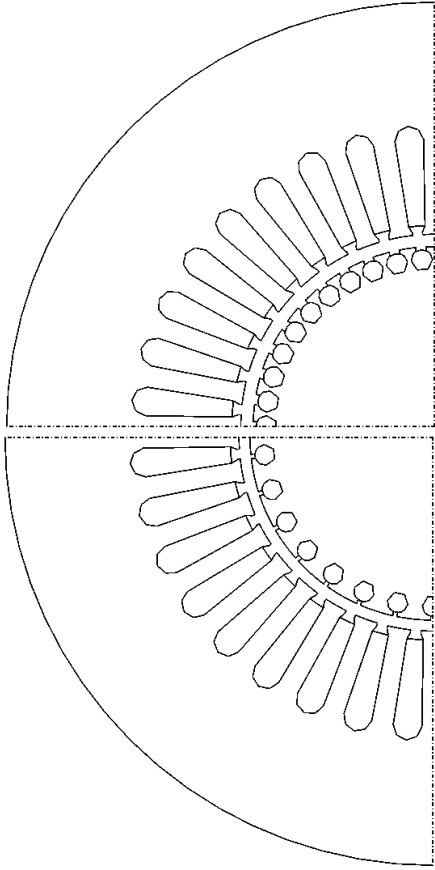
Initial (left) and optimized (right) designs of the cage A rotor.
